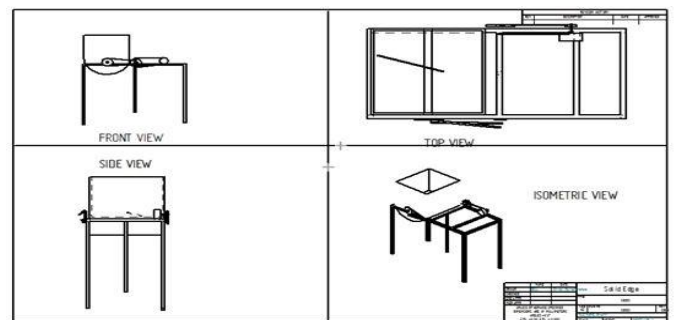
Orthographic Projections of Cow Dung Processing Machine
